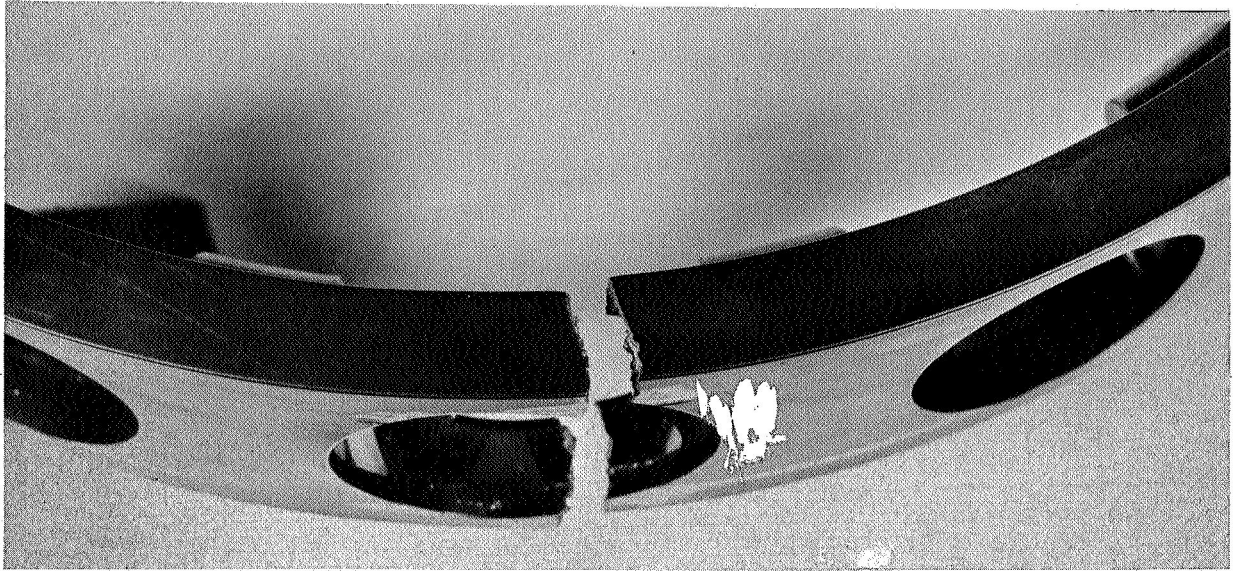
CAGE FAILURE - BEARING S/N 15
